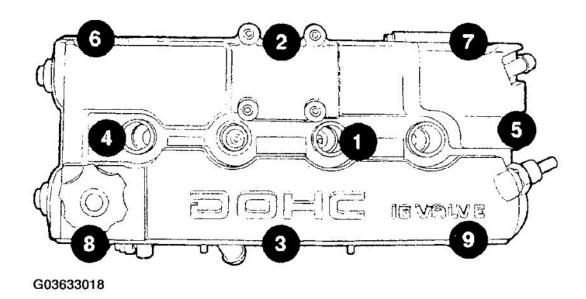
Tightening Sequence Of Cylinder Head Cover Courtesy of DAIMLERCHRYSLER CORP.
